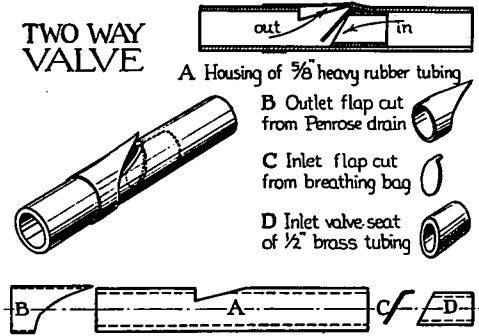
Exhalation valve disassembled to show component parts and assembled ready for use.
